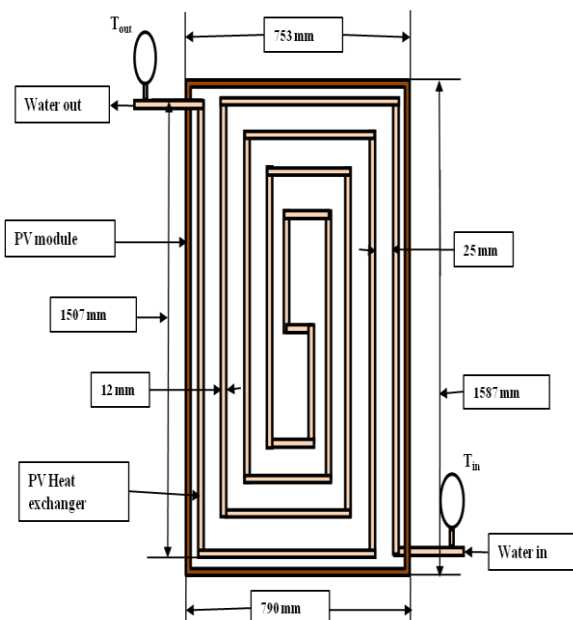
Module and heat exchanger assembly with important dimensions and necessary features
